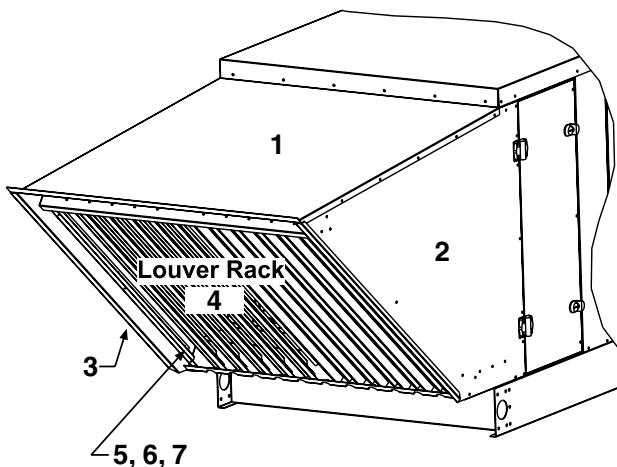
Inlet Air Hood Assembly (Refer to [Table 49](#))
